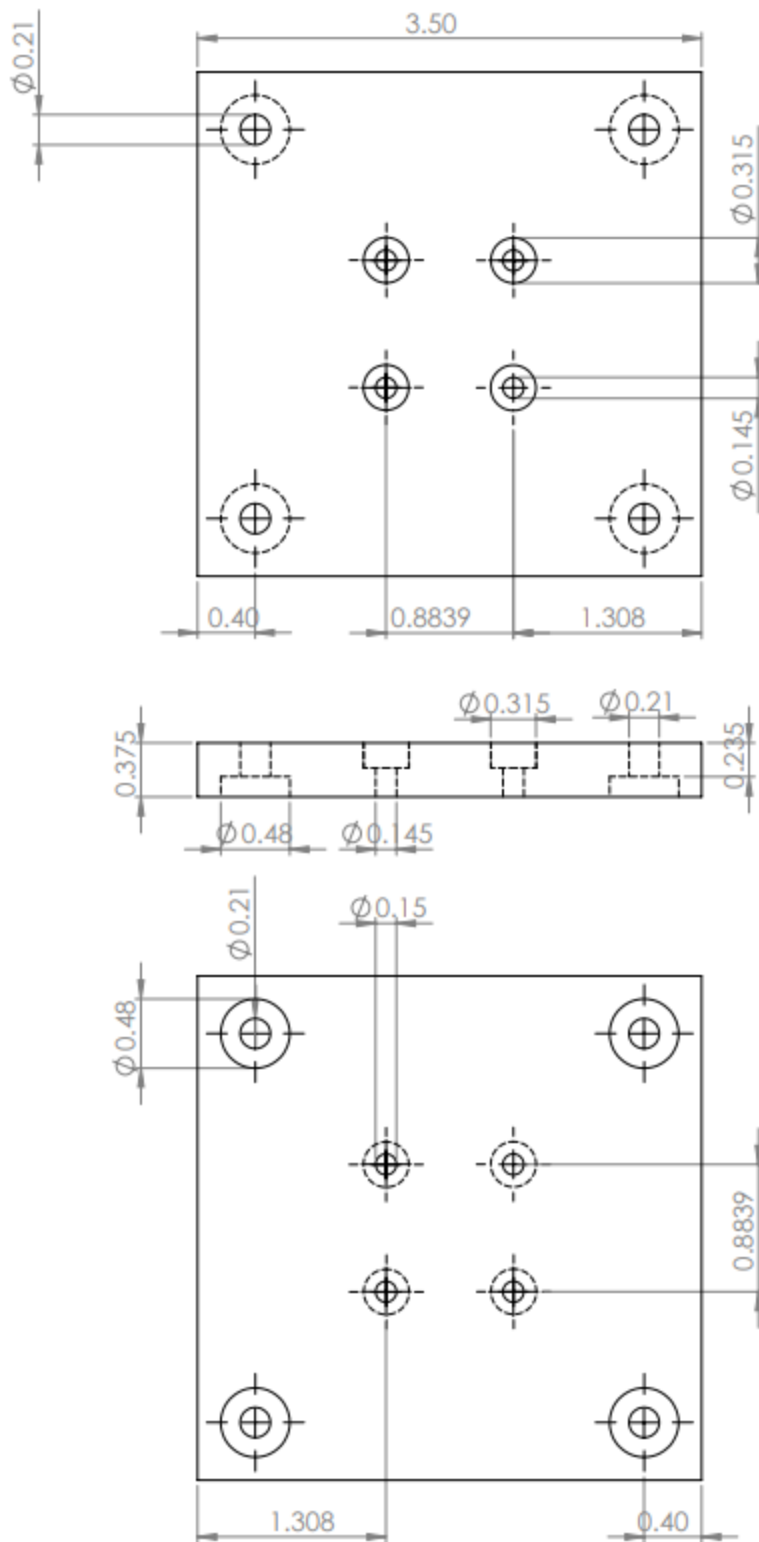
Sensor Mount 1 Engineering Drawing (IPS)
